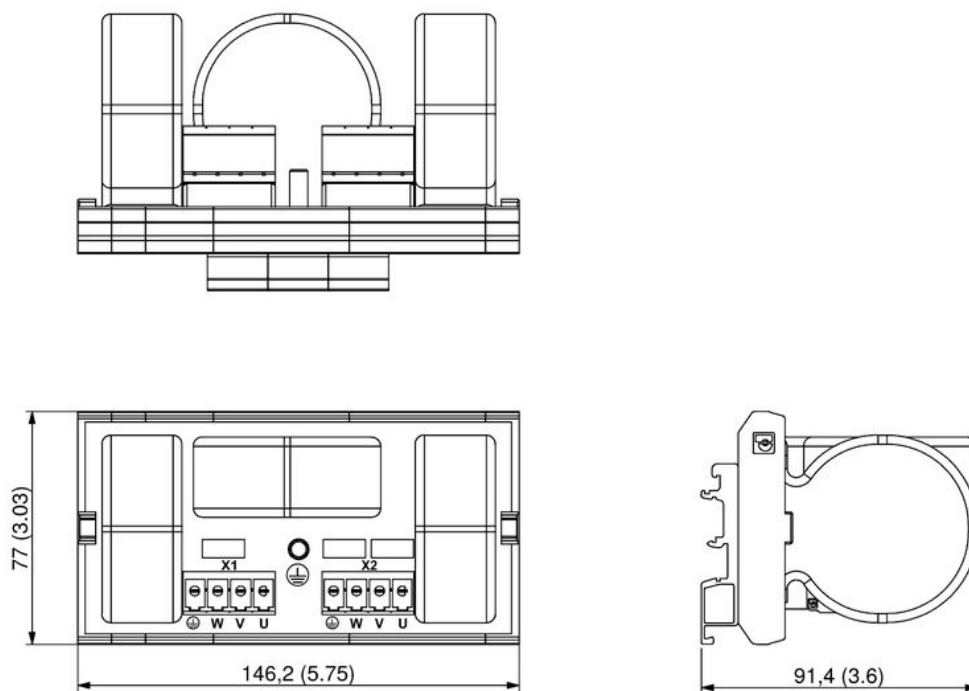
Dimensions of the choke module 036210081/x in mm (inch)
